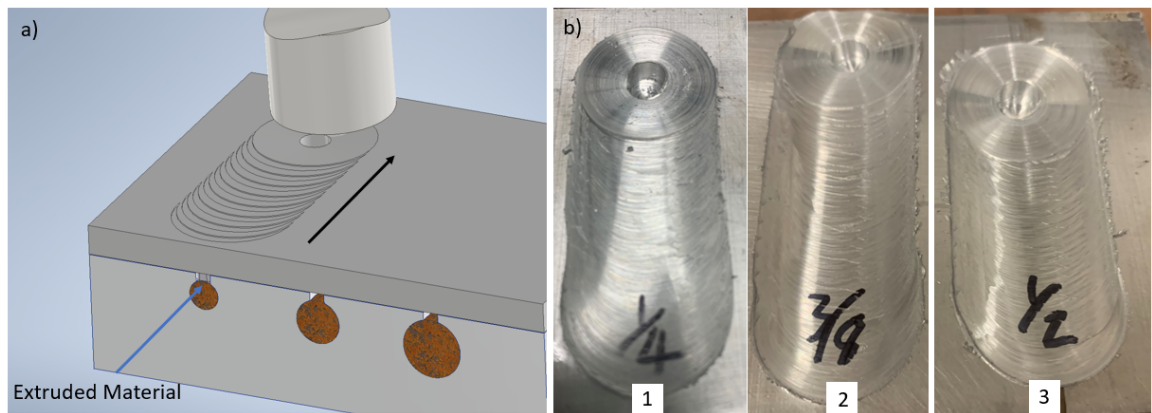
Left: Diagram of FSE process. The extruded material from the top plate interlocks with the groove on the bottom channel. Right: Top view of completed FSE runs for each channel size.
